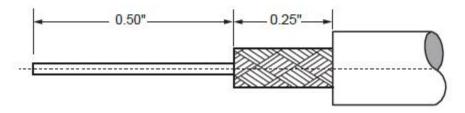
■ Proper Strip Lengths Required to Make a Crimp Connection
